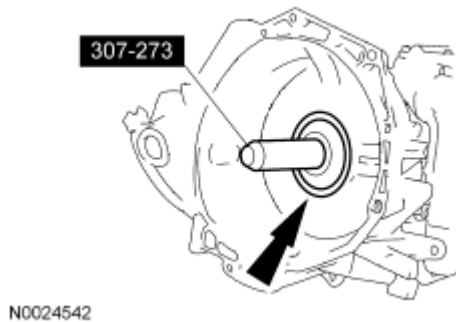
Installing Torque Converter Fluid Seal Using Special Tools
